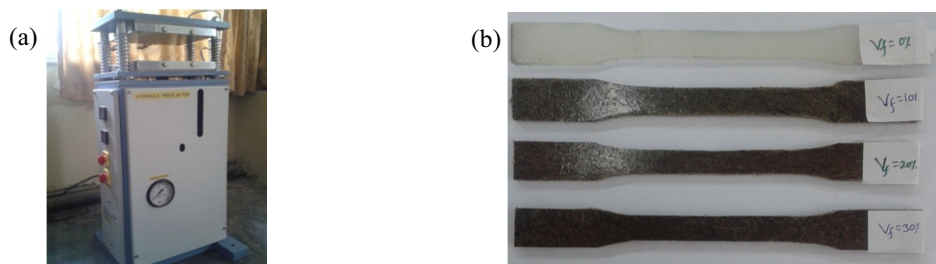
(a) Compression molding machine (hot press type); (b) Actual specimen of tension test.
